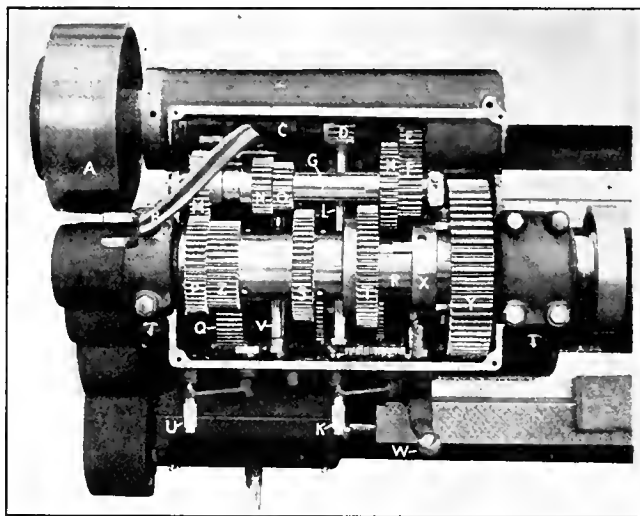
Top View of Headstock with Cover Removed, showing Speed Change Connections
